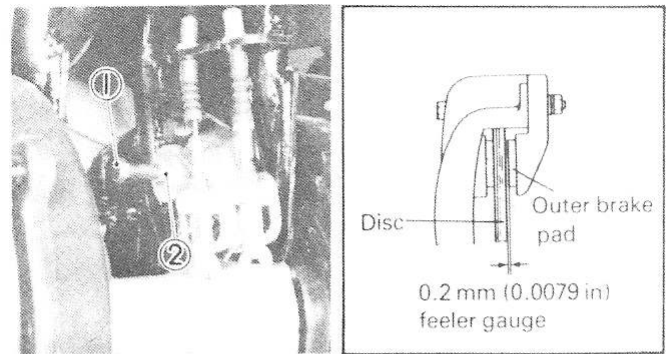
On YT 125/175 models, loosen the locknut (2) and bolt (1), then slip a feeler gauge between the disc and outer brake pad to adjust the pad-to-disc clearance (Sec 23)
